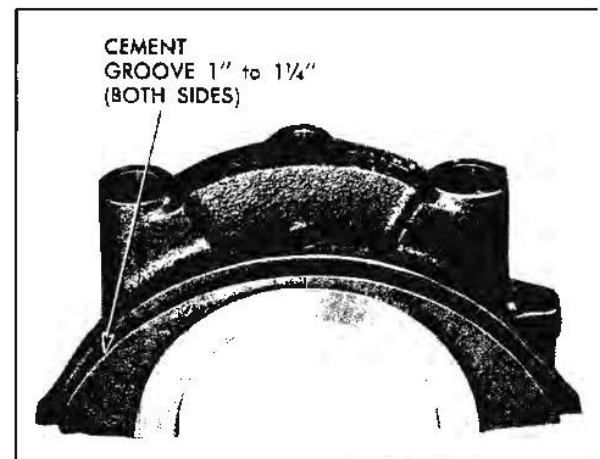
Rear Oil Pan Gasket Positioned in Bearing
